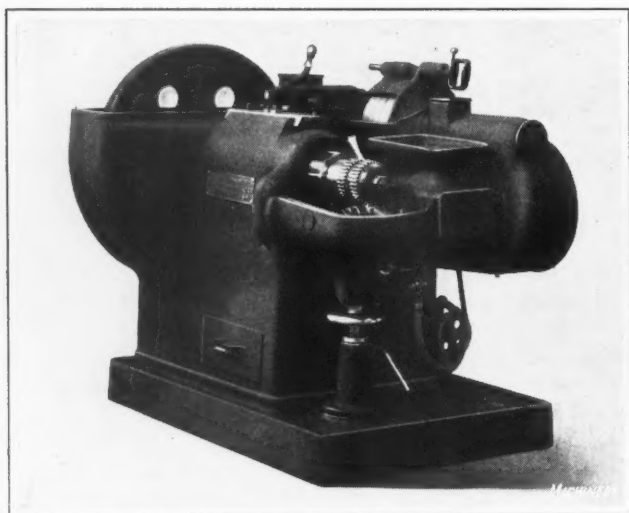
View of Machine from Right-hand End, showing the Hob-spindle Housing and Micrometer Jack
